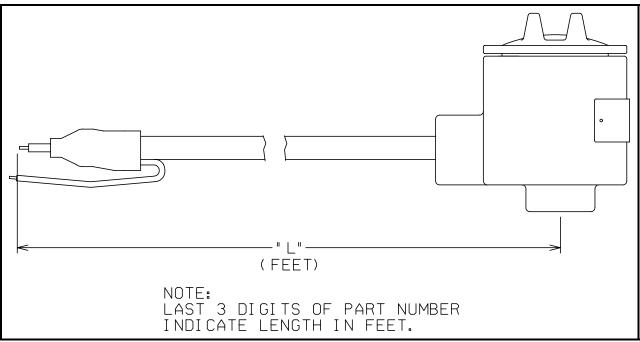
Dimensions Conduit Outlet Box And Cable Assembly (032KC700-XX, 032KC800-XX & 032KC900-XX)
